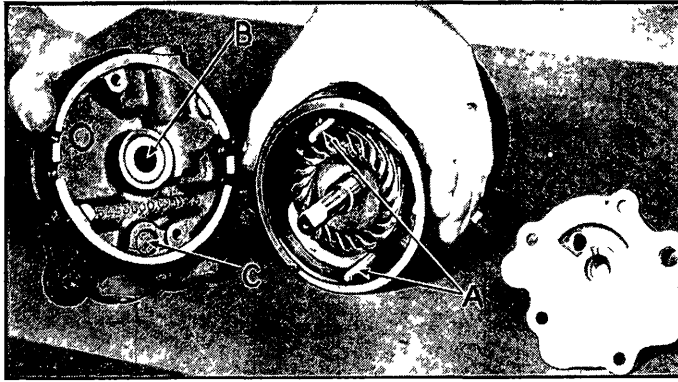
Showing inner rotor "B" and outer rotor "A" on Moraine pump
